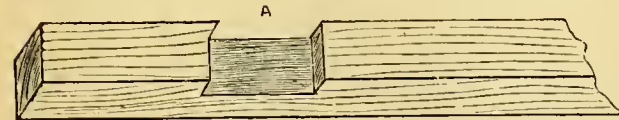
PART OF CROSS-PIECE FORMING TOP OR BOTTOM OF FRAME.
